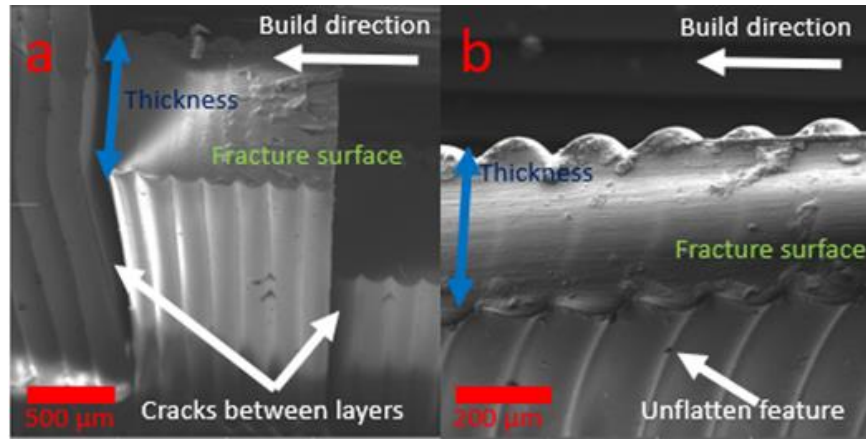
6 SEM of tensile test fracture surface for (a) Control sample; (b) 2.13 W laser sample.
